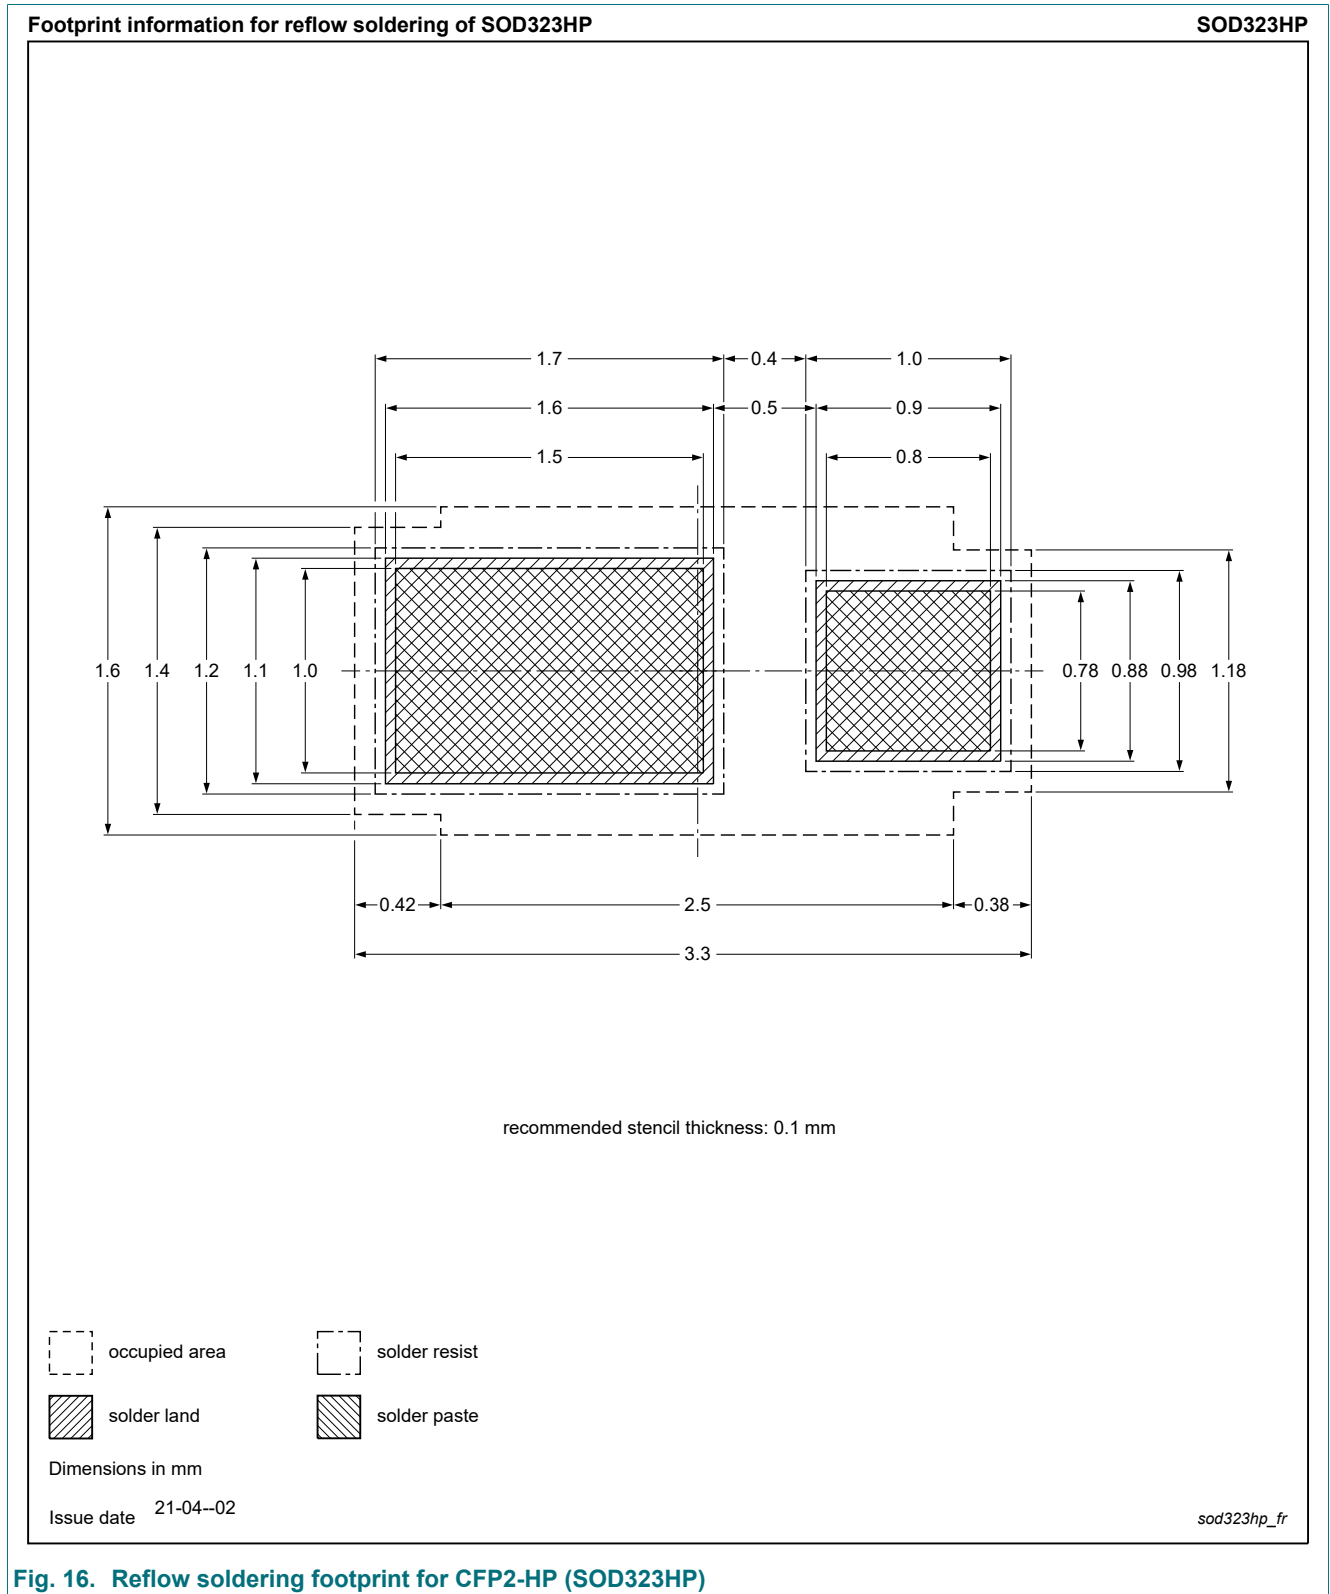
Reflow soldering footprint for CFP2-HP (SOD323HP)
